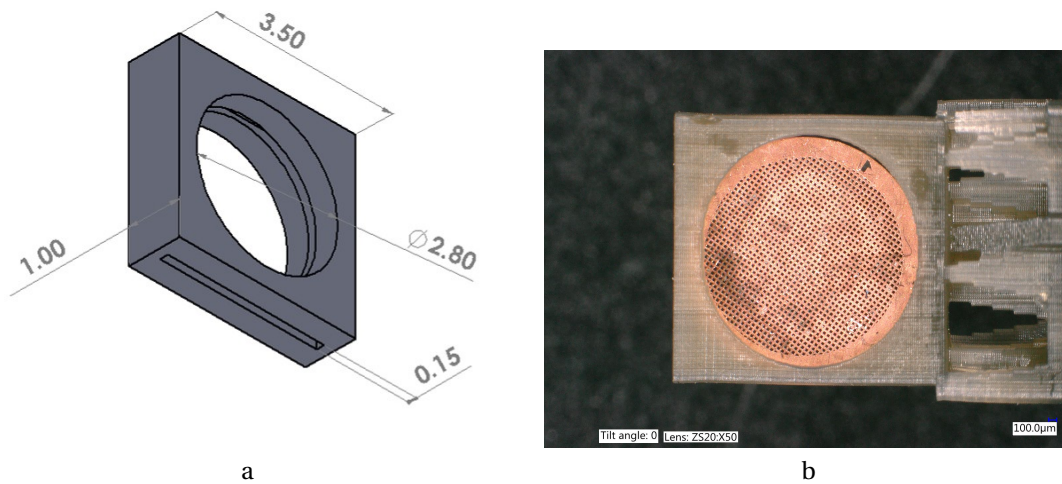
(a) Dimensions of the grid holder and (b) 3d printed grid holder (inset: grid holder with the finder grid)
